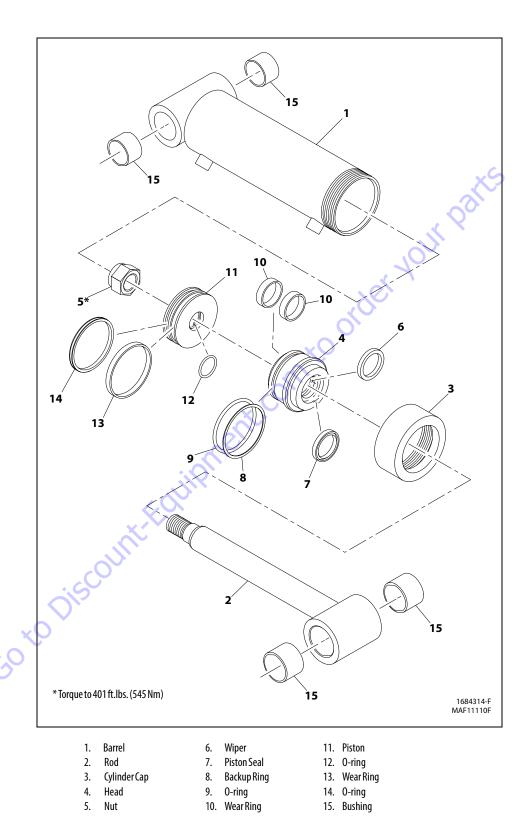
Steer Cylinder (SN 0300209000 through 0300238017)
